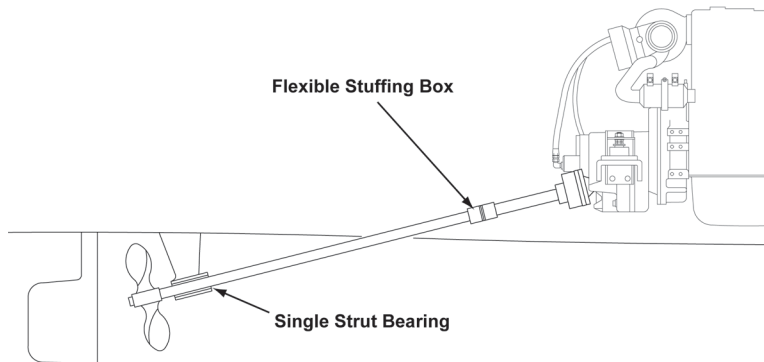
Propeller Shaft for a Flexibly Mounted Engine
